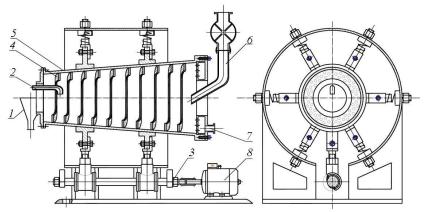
Vibrational extractor 1,6 - loading and unloading of raw materials, 2,7 - extractant supply and discharge branch pipes; 3 - eccentric weight, 4 - perforated spiral gutter, 5 - conical drum; 8 - electric motor
